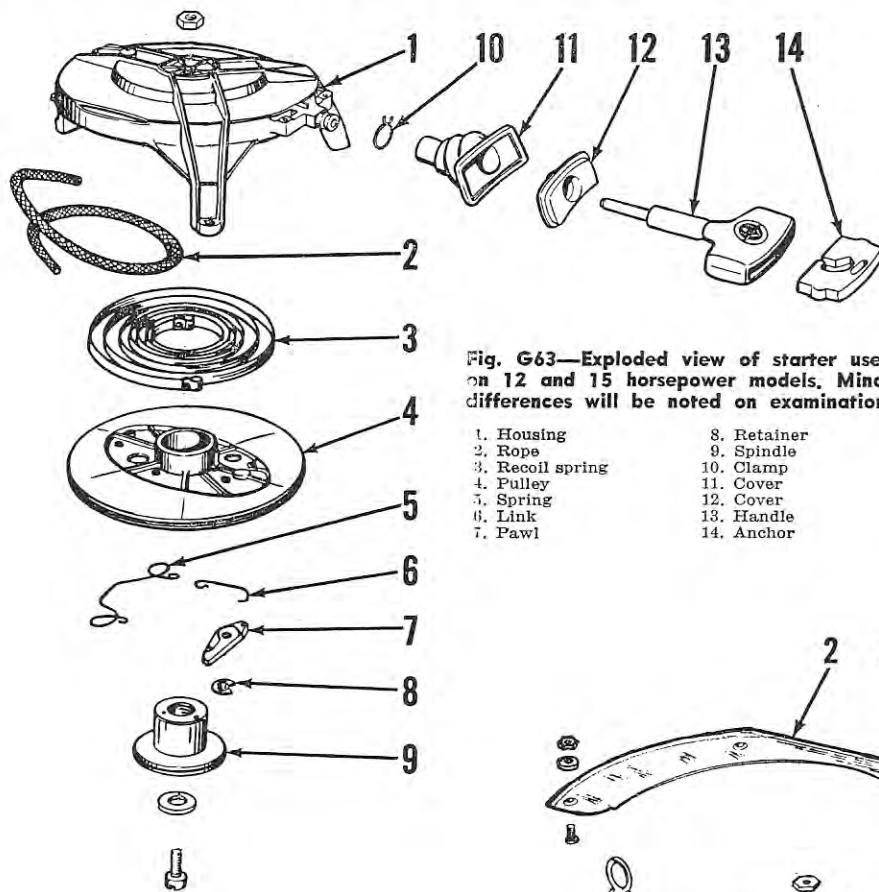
Exploded view of starter used on 12 and 15 horsepower models. Minor differences will be noted on examination.
